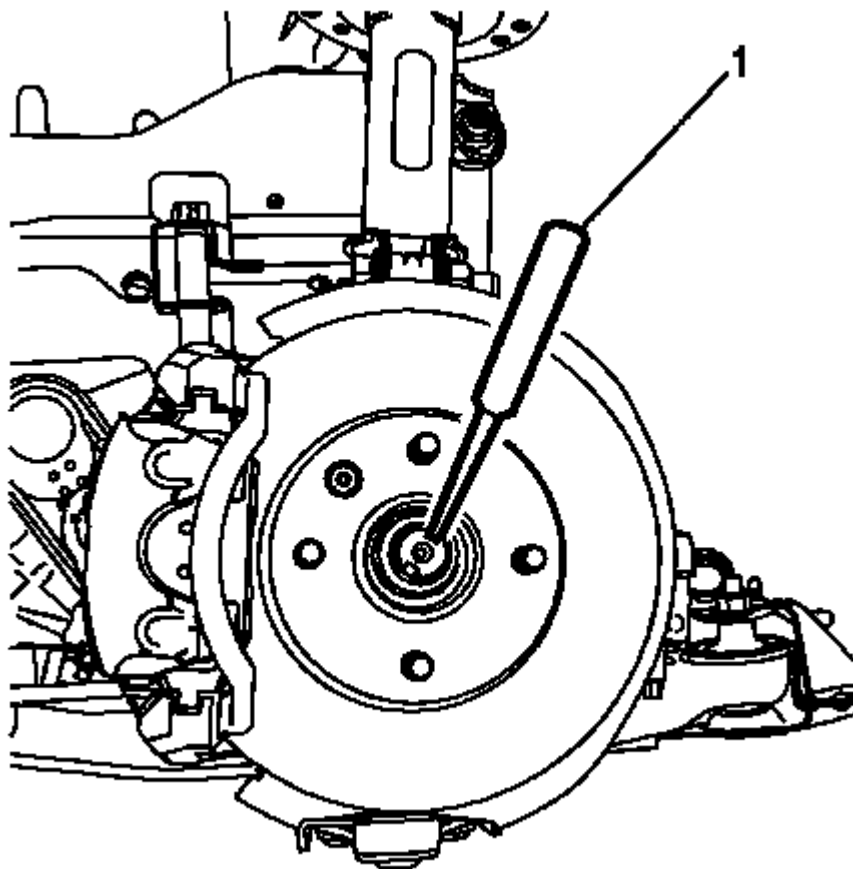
Staking Wheel Drive Shaft Nut With Punch
